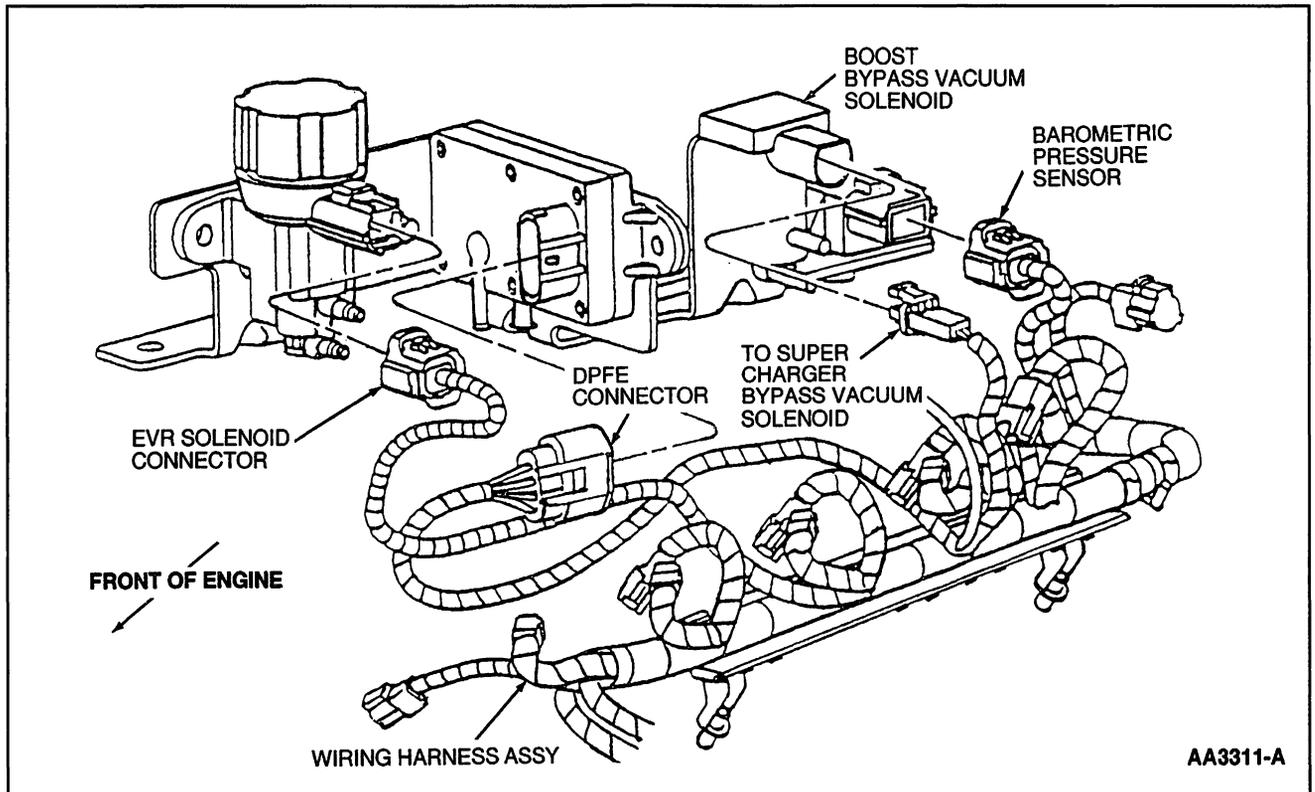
5.4L Supercharger Controls—Wiring Harness Assembly
